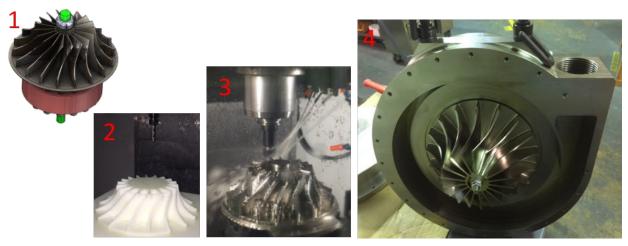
IFR turbine manufacturing—CAD (1), prototyping (2) and (3), final product (4)
